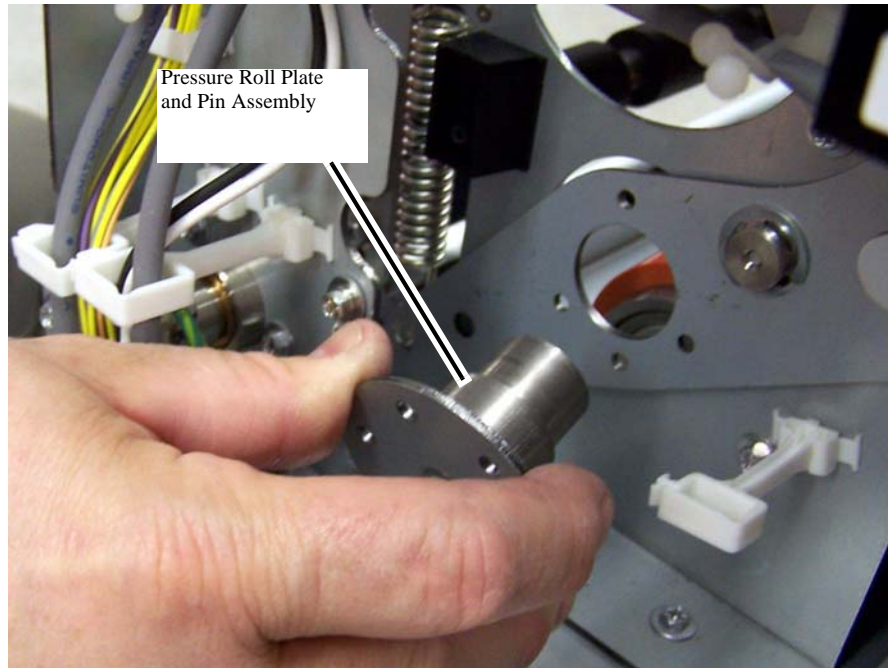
Pressure Roll Plate and Pin Assembly (same both ends of Pressure Roll)
